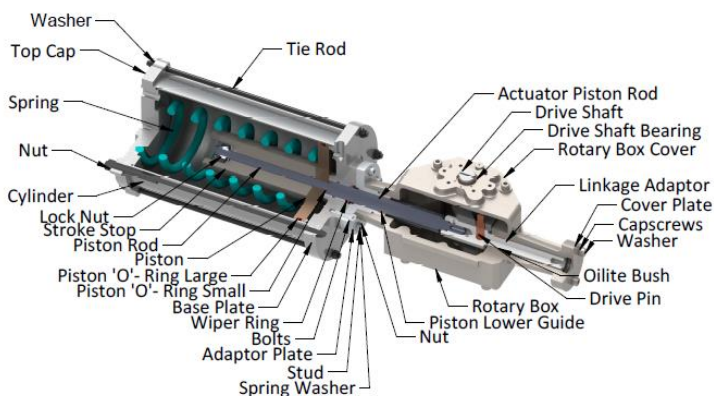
Rotary Actuator (P25, P50, P100, P200) Cross Sectional Layout
